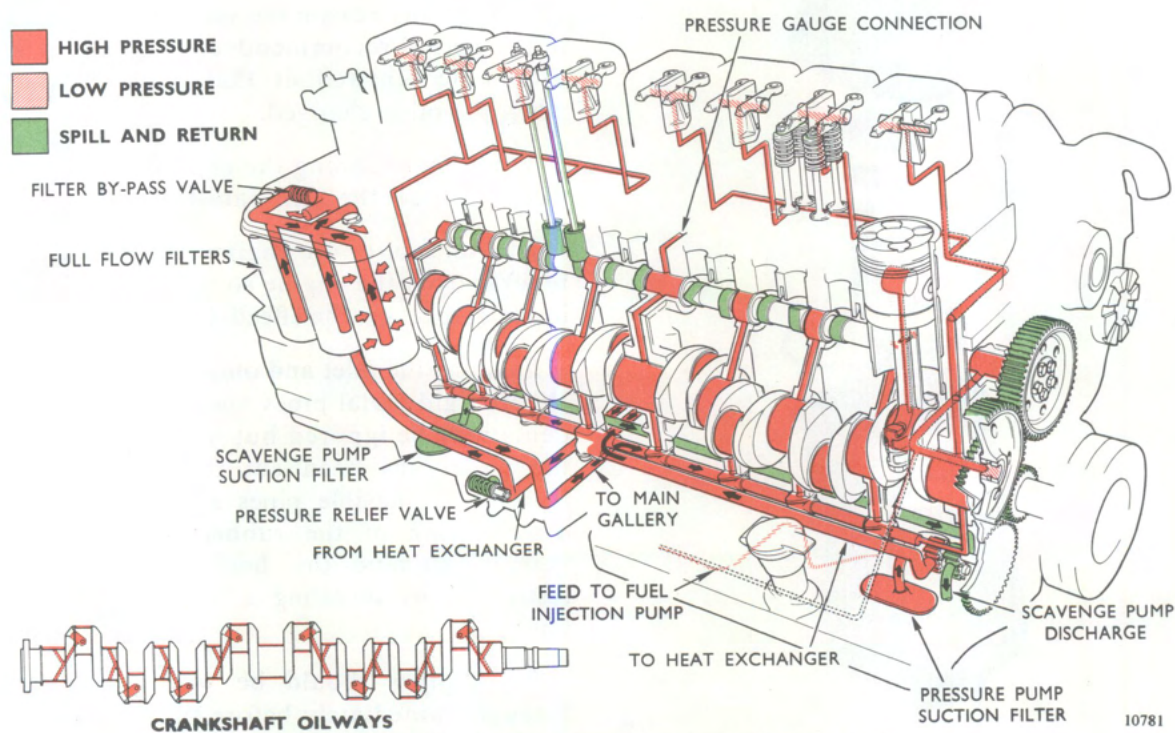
Lubrication system — semi-dry sump, 4-valve head engine.
